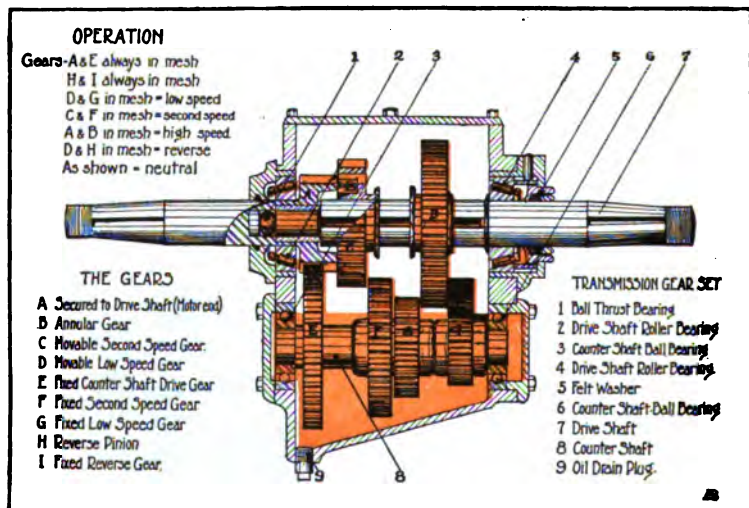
SEC. 10d.—Automobile transmission gears. (Courtesy, Atlantic Refining Co.)
